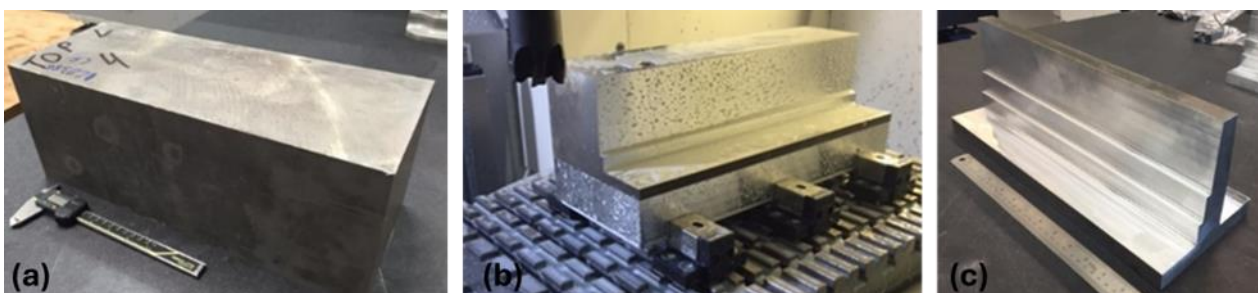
AA7075 billet; a) initial geometry, b) machining trial #01, c) final geometry
